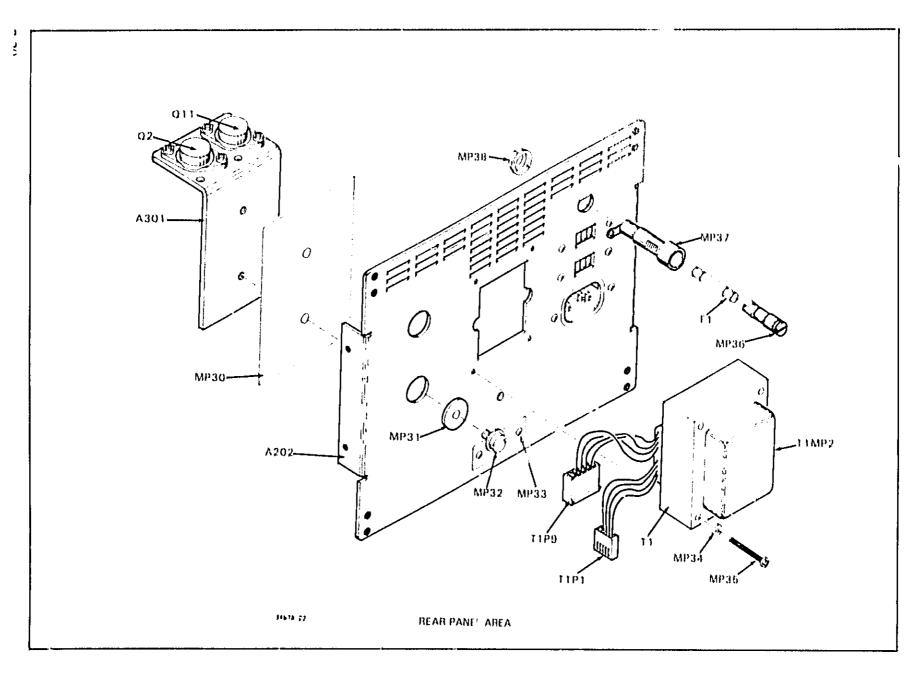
Exploded View, Miscellaneous Parts (Cont'd).
